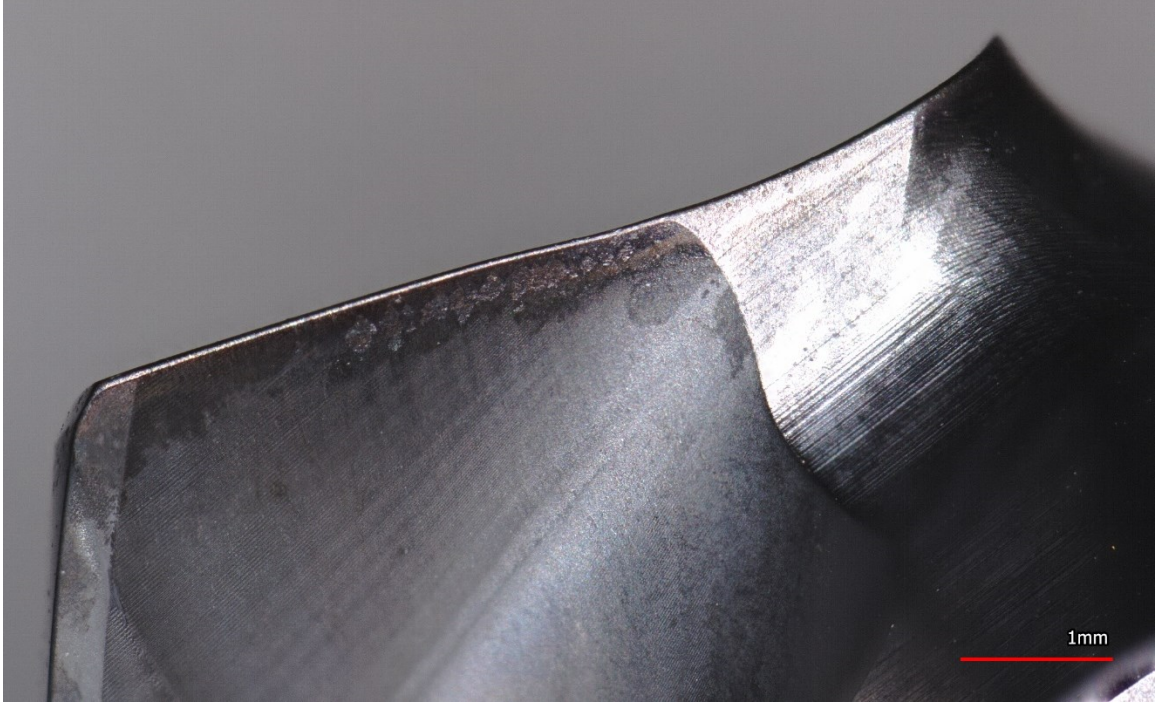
Drill insert rake face after 56 holes in ADI. Minor pitting beginning to appear.
